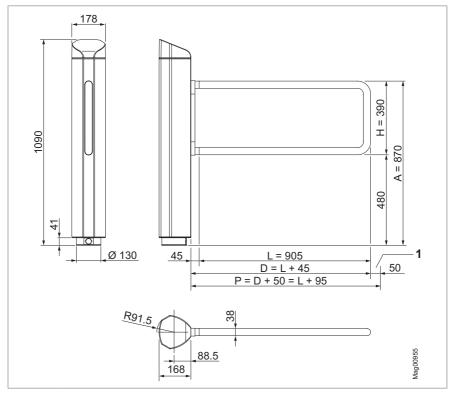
Dimensions mSwing with bracket FMSW_MU (dimensions in mm)
